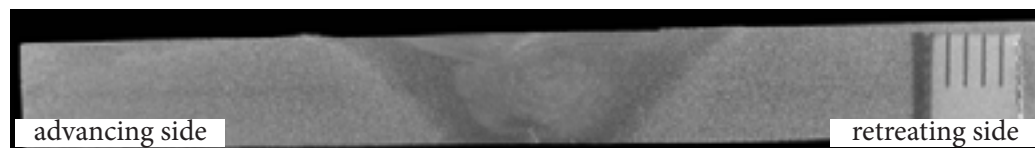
Macrostructure of the FSW weld made of aluminium alloy EN AW-6082; welding parameters $V_n = 1800$ rpm, $V_z = 1120$ mm/min; Triflute type tapered tool; etchant: Keller's reagent [8]
